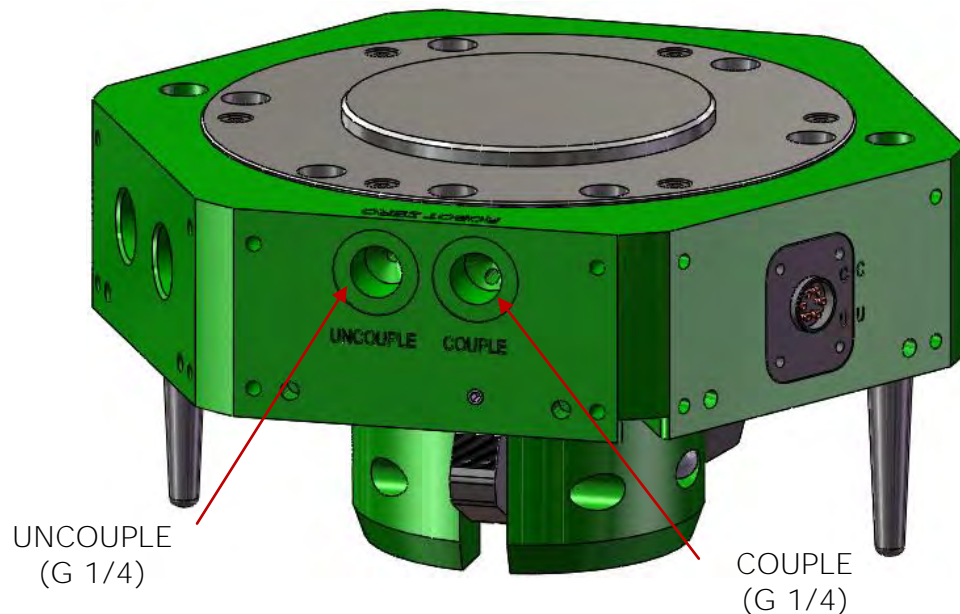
E125LP Robot Adaptor Air Supply Ports
